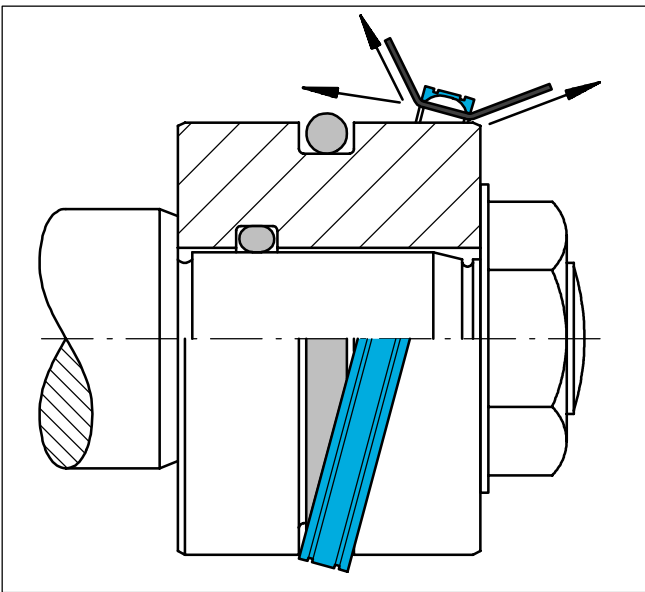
Fitting the Seal Ring onto the O-Ring in the Groove
